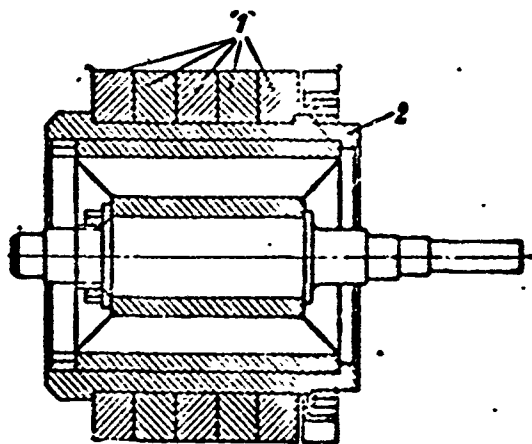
"Spider" type rotor composed of several magnets.
